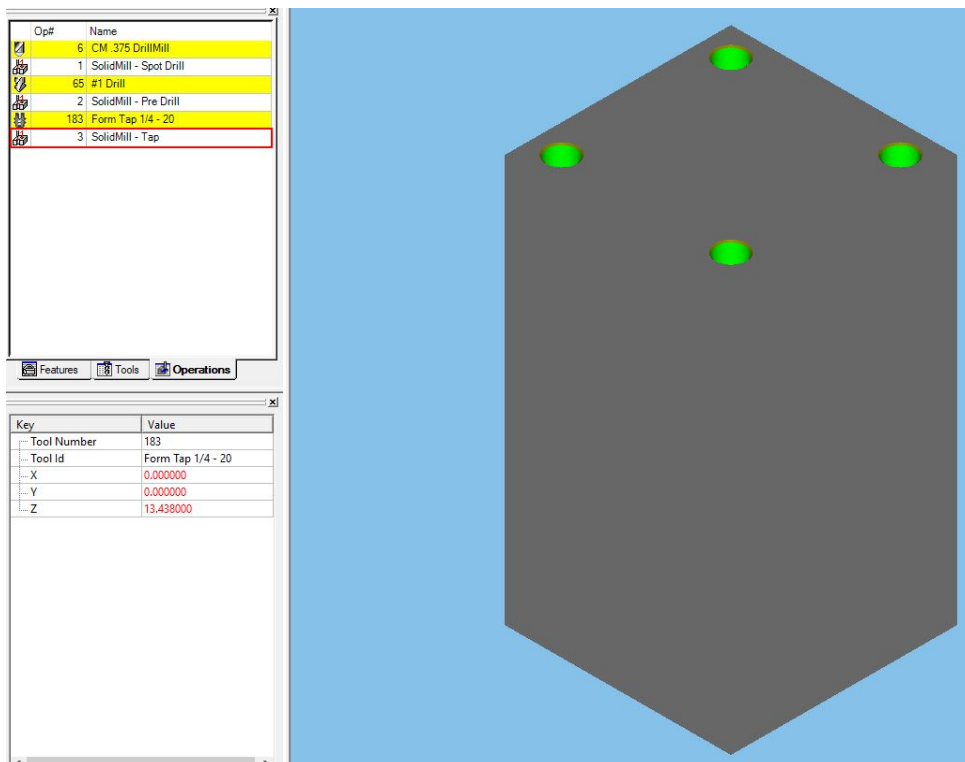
Motor Mount Side Block Threads ESPRIT Simulation
